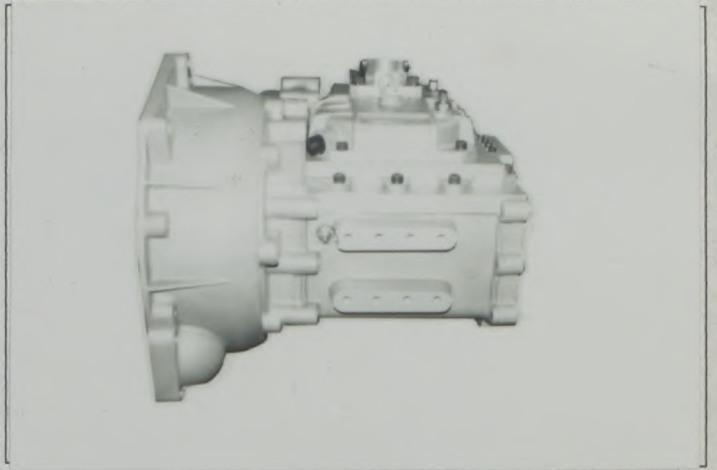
Additional gearbox reverse gear control linkage, TYPE A
